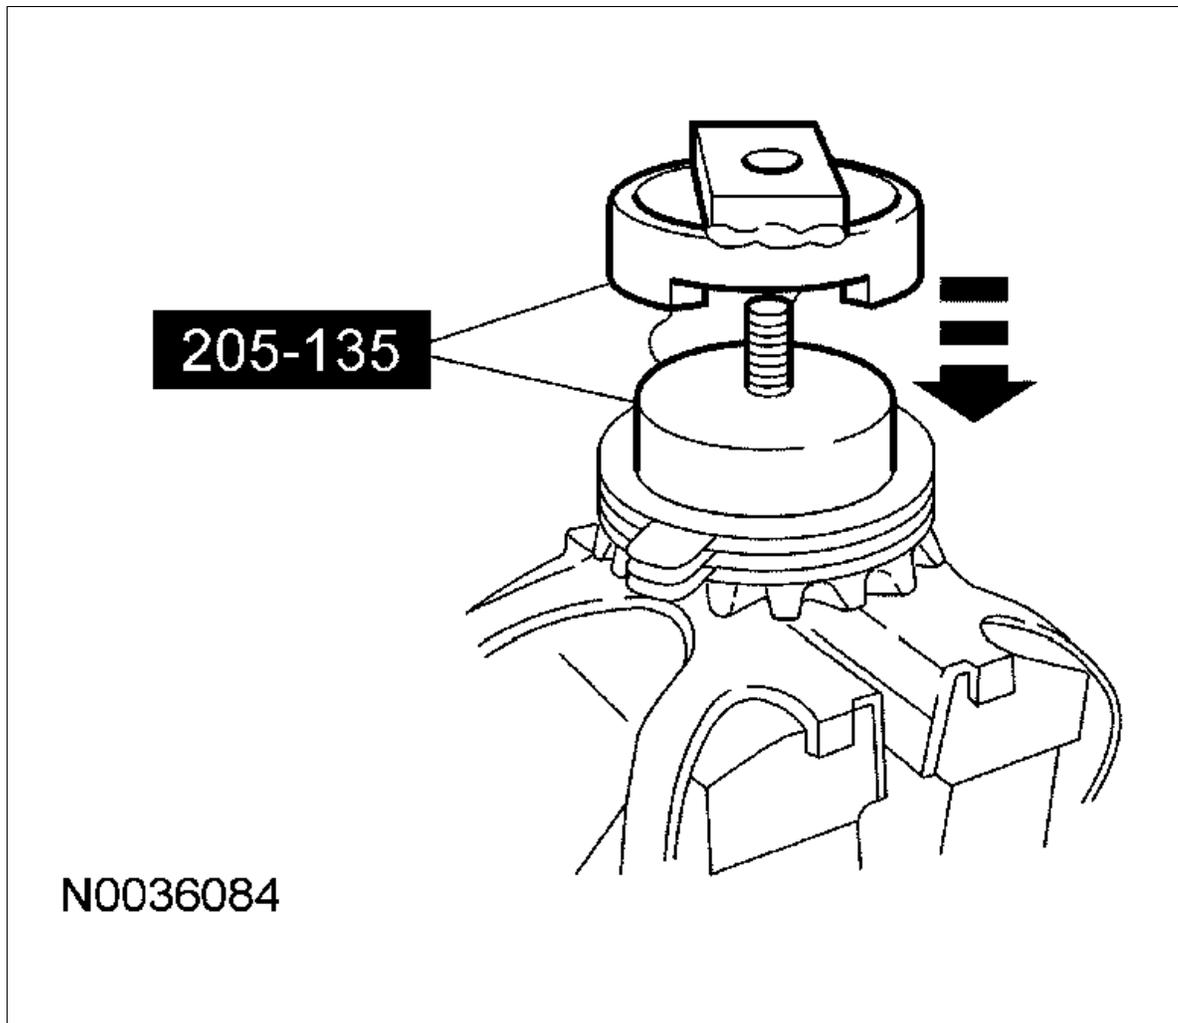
Positioning Special Tool Hand-Tight On Top Of Differential Clutch Pack
